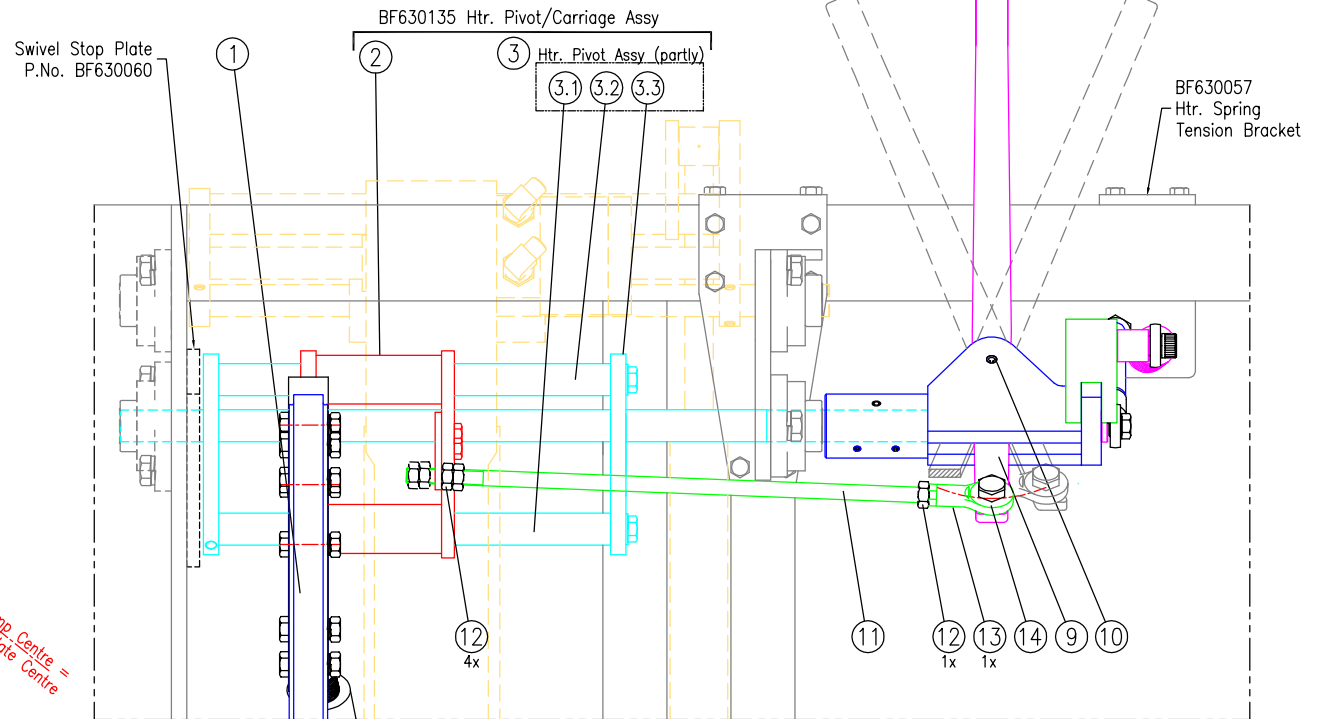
HEATER PLATE ASSEMBLY OPERATORS MANUAL ONLY	Scale: Not To Scale Drawn: SR Date: 10/06/09		Copyright ©. No part of this drawing may be reproduced in whole or in part without the written permission of Dixon Industries Pty. Ltd. www.dixonind.com.au
